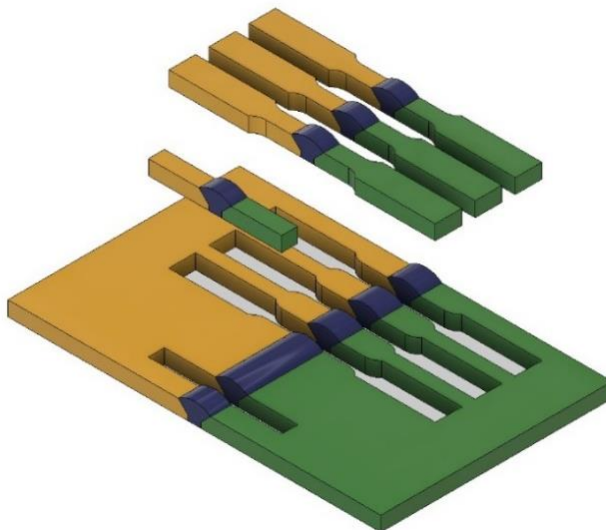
3D Weld model and test specimen coupons.
